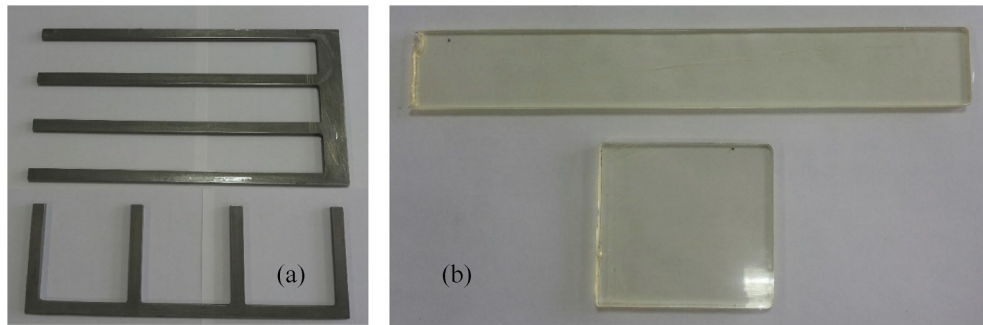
(a) Metal rectangular molds, (b) epoxy resin specimens for tensile and shear tests.
